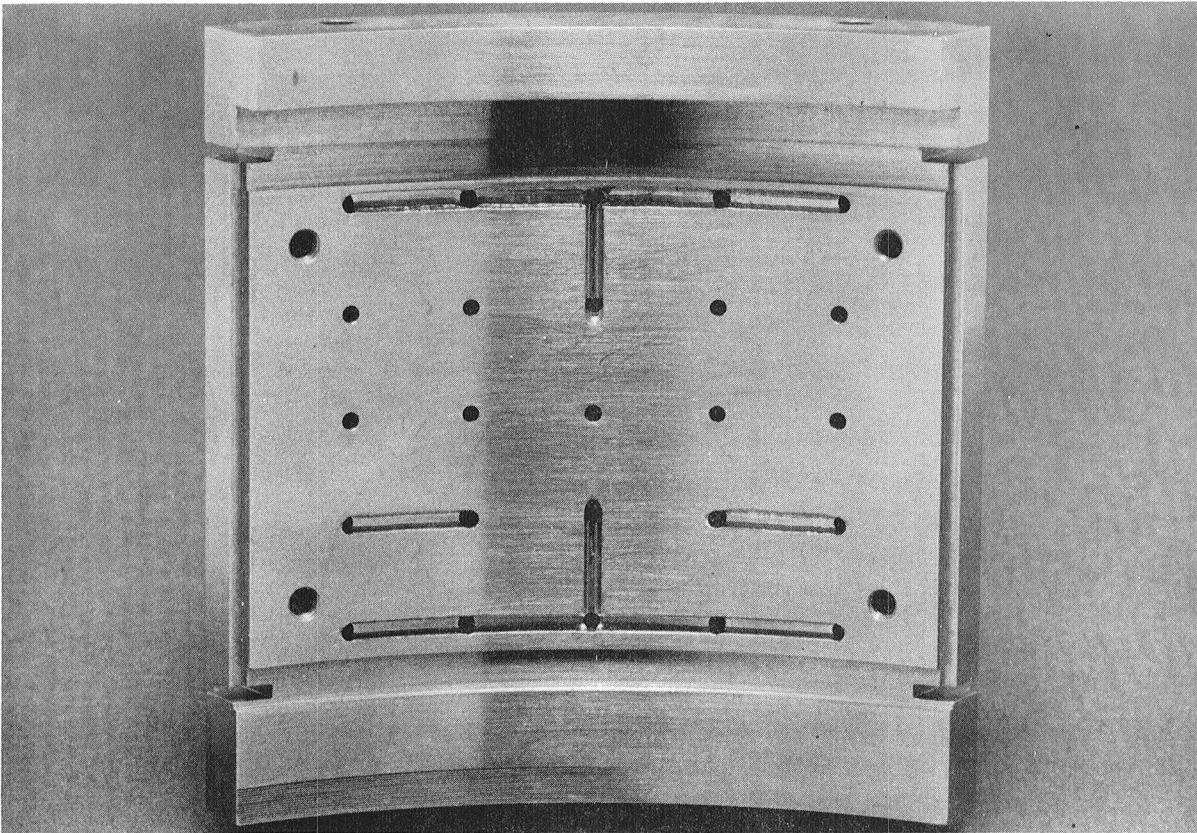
Interior of 25 Hole Pad Modified with Inlet Feed Grooves
